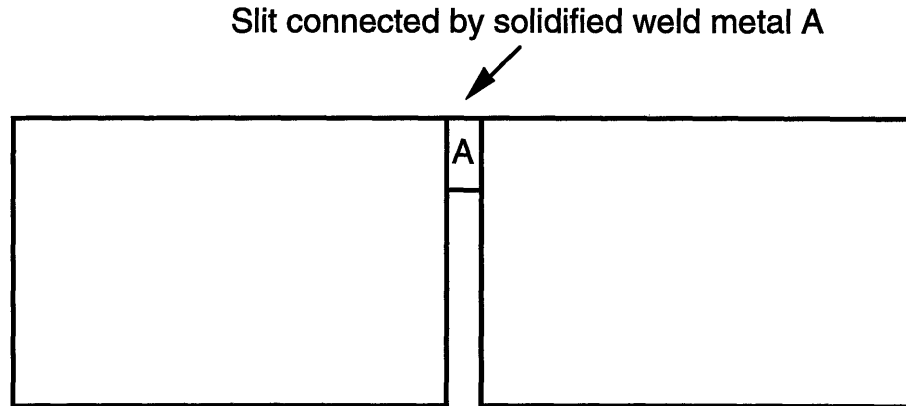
The same specimen after the weld metal solidifies
